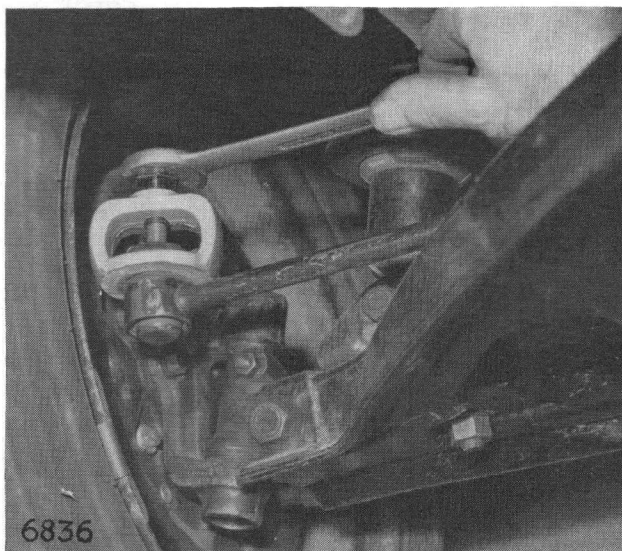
The track rod being removed with special tool RG.284, after the ball pin nut has been removed
